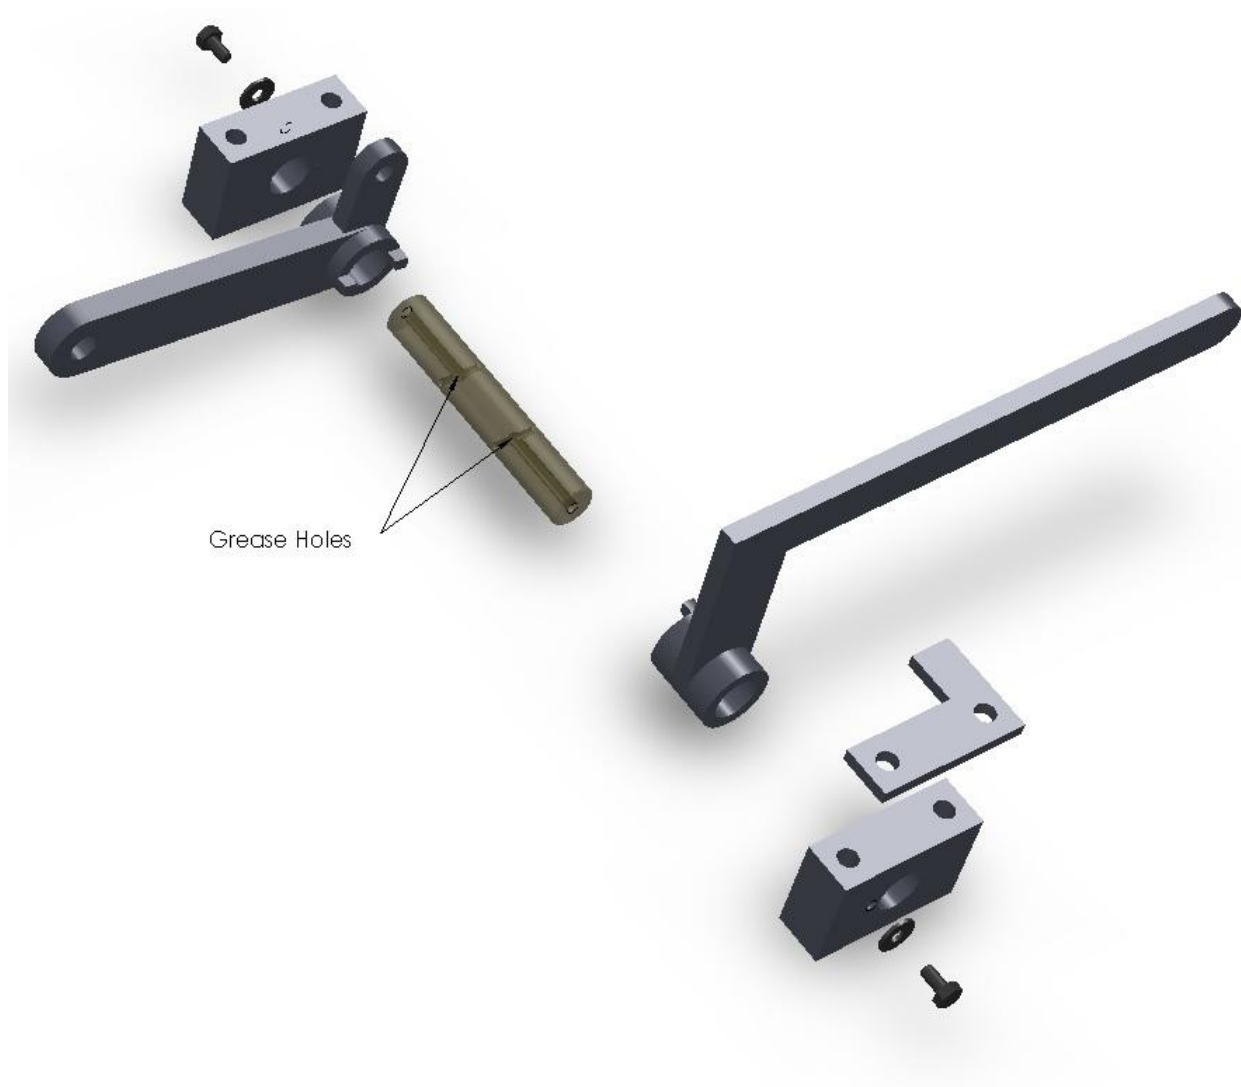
Exploded view of caliper activation assembly, showing grease holes in pin
